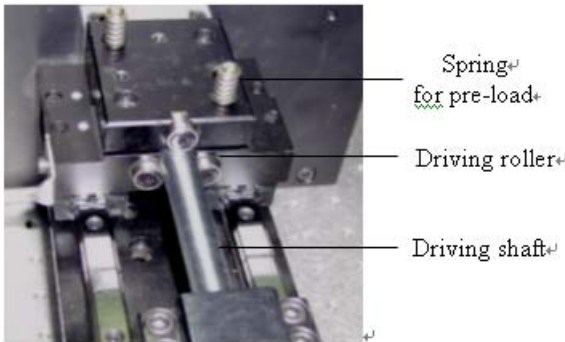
Design and assembly of one axis twist roller friction driver using air bearing guide
